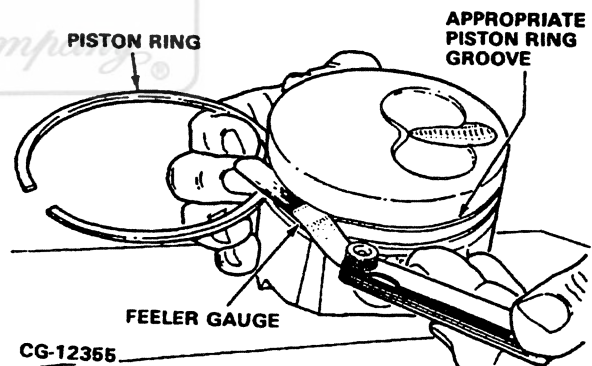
Checking Ring-to-Groove Side Clearance with Feeler Gauge
